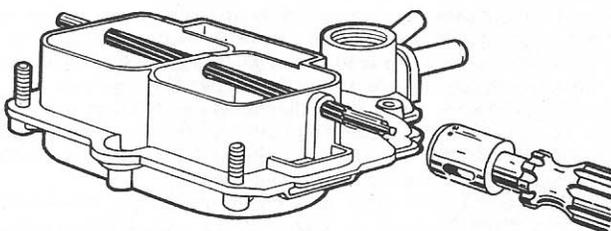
Reaming the choke shaft bore (Sec 7)
